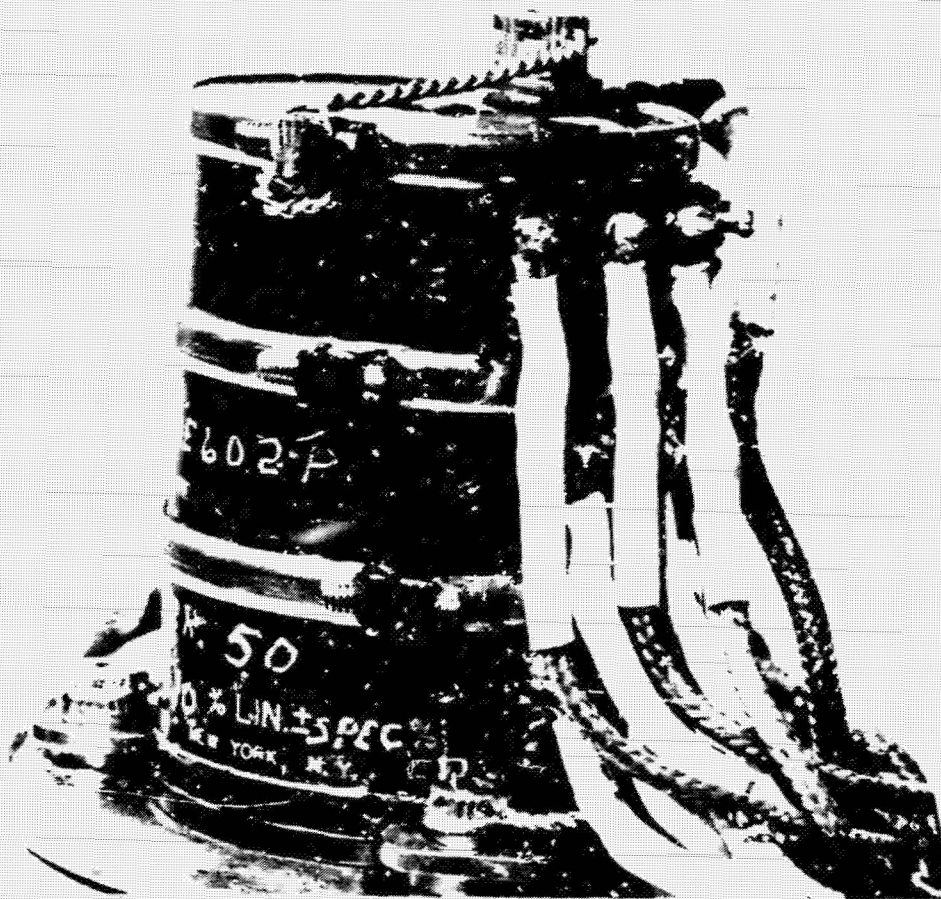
(U) NRX-A6 Side-By-Side Actuator Post Test Condition (Three Decs Pot ntiometer, Solder Joints, Wire, and Insulating Sleeves).
